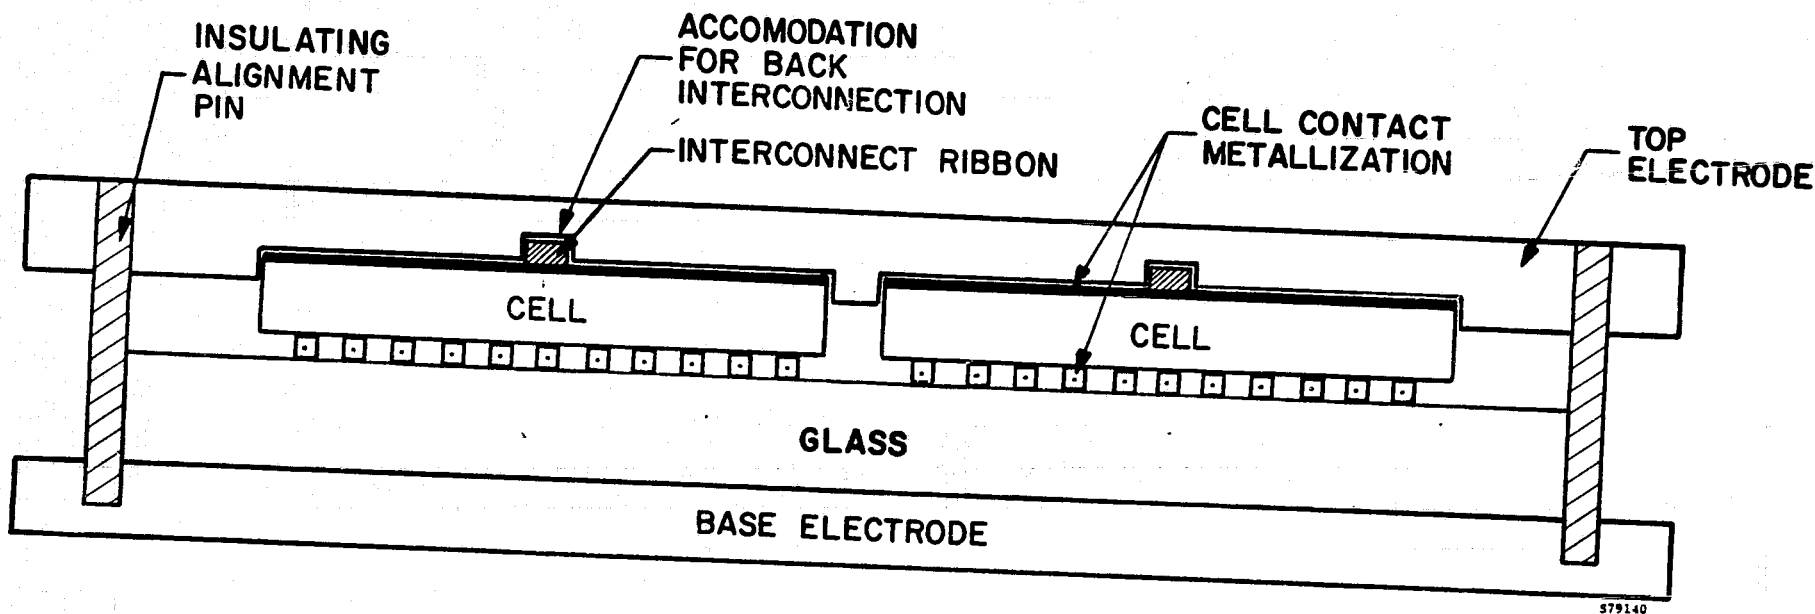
COMBINED ELECTRODE AND CELL ALIGNMENT FIXTURE FOR MODULE FRONT BOND
